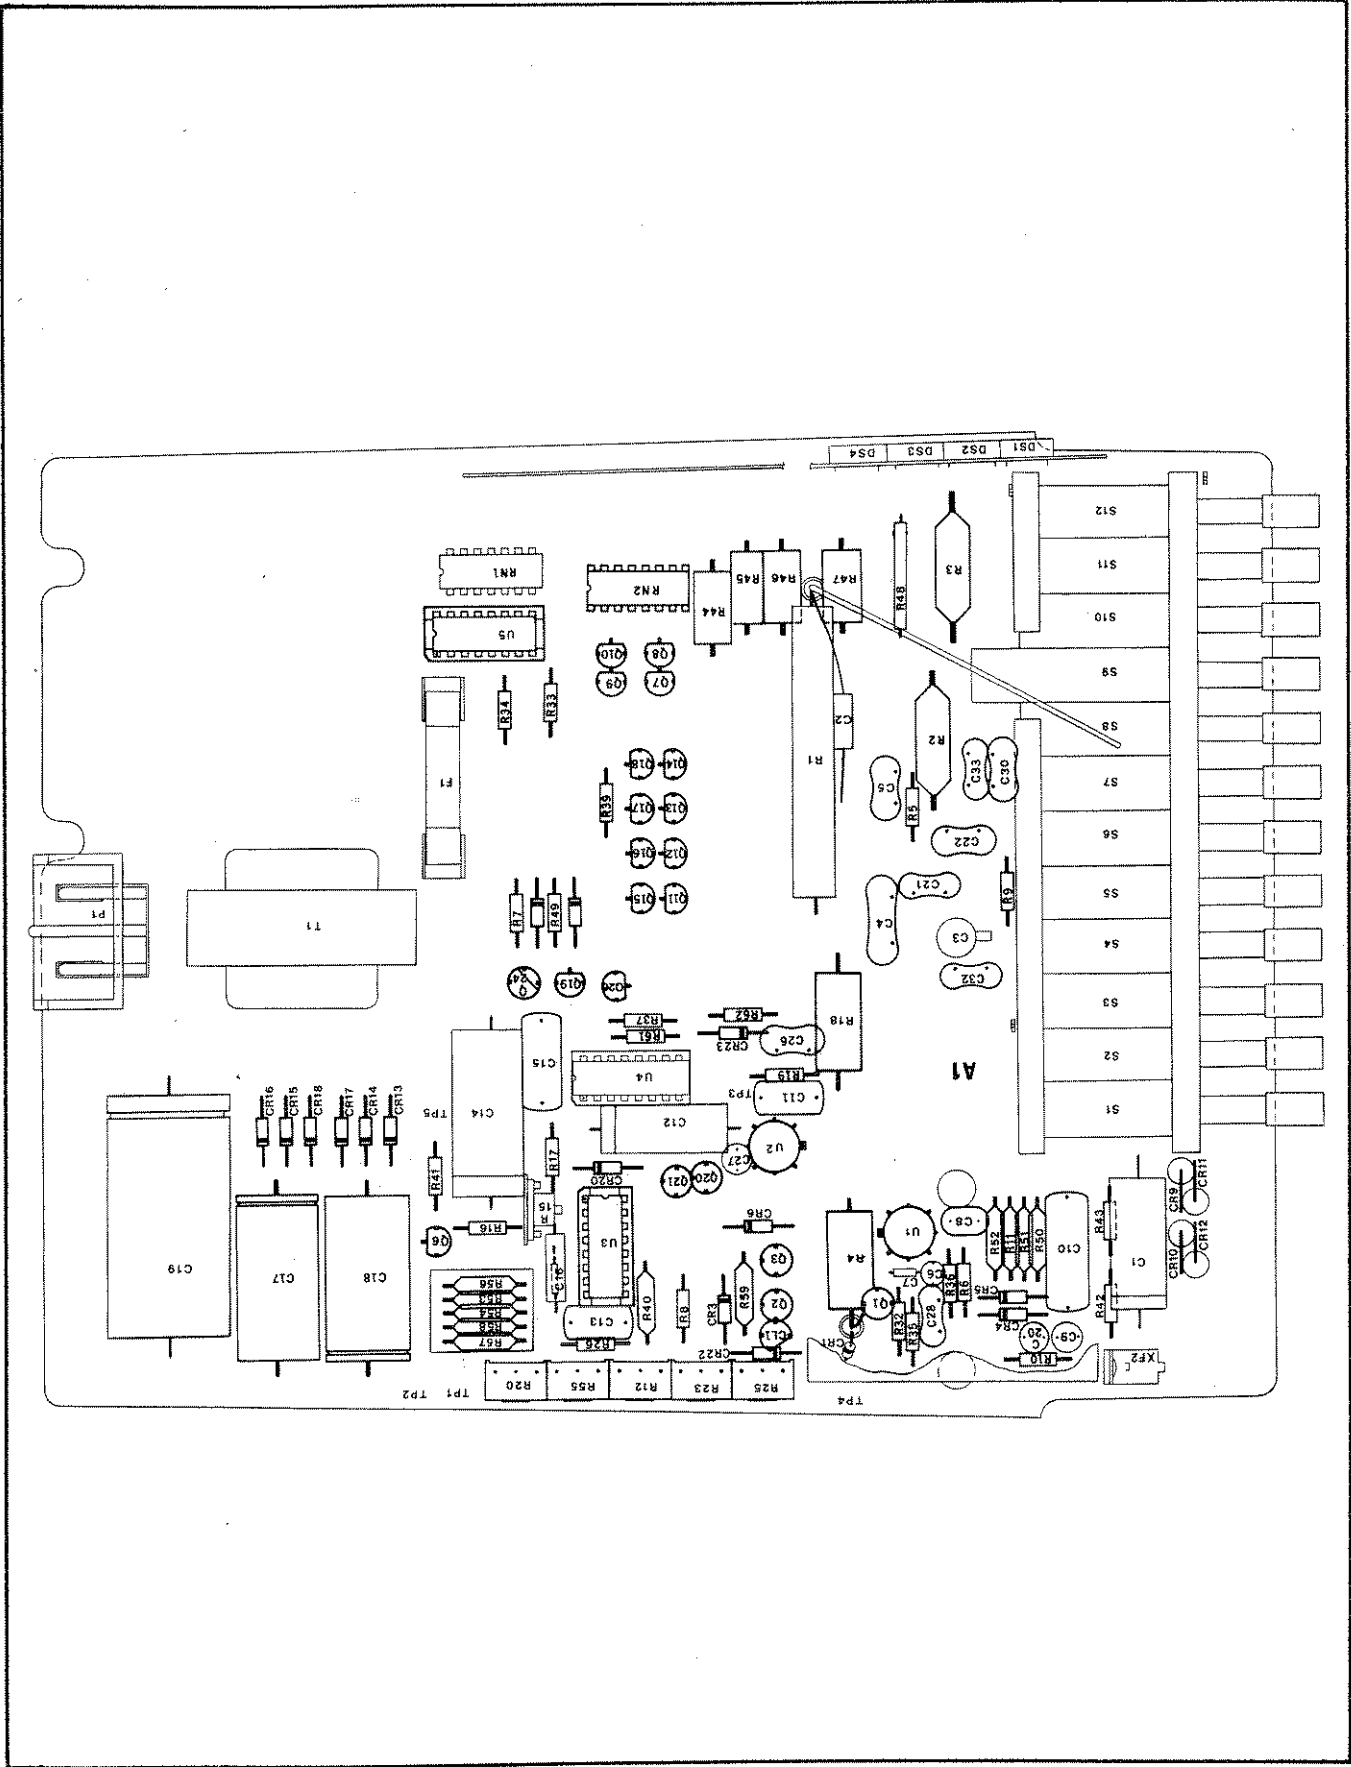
8000A-01 MAIN PCB ASSEMBLY
